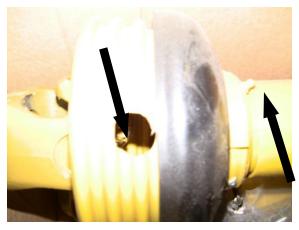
PTO Driveline Cross Bearing (Left Arrow) and Plastic Shaft Bearings (Right Arrow).
